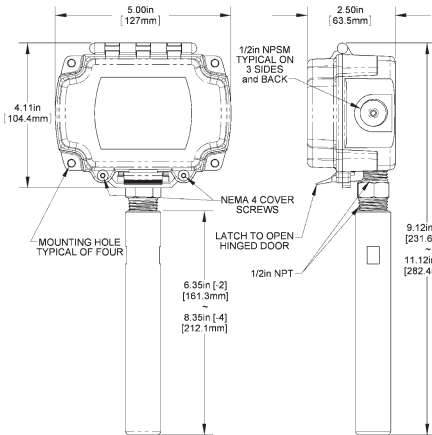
BB, 2" & 4" Buffer w/SS Threaded Fitting
